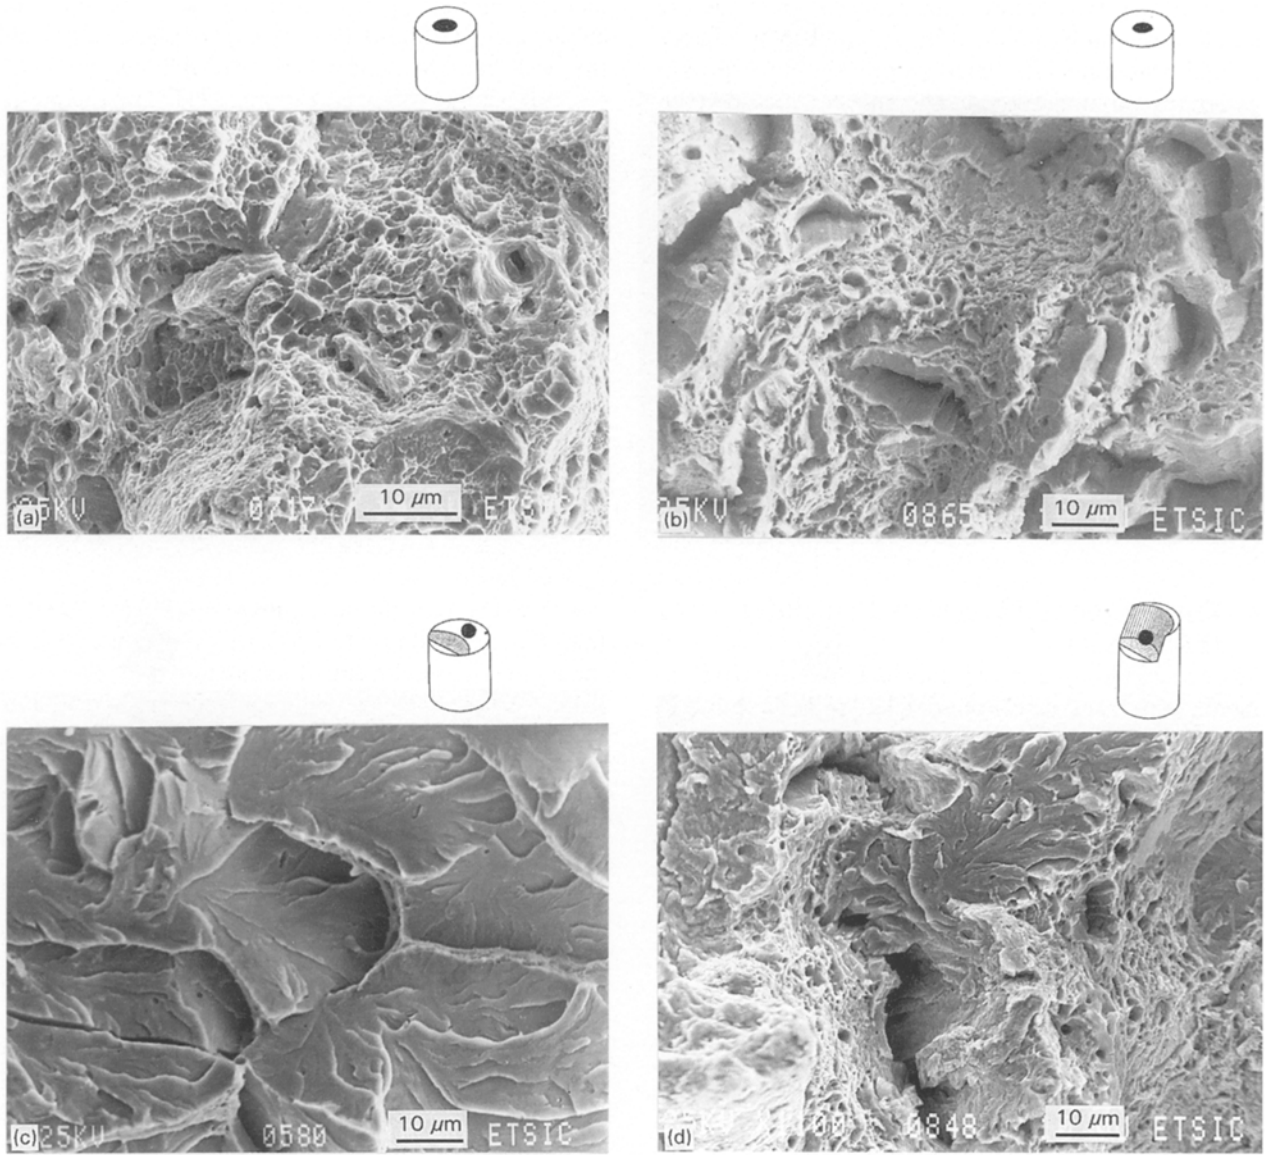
Microscopic modes of fracture in (a, b) smooth and (c, d) pre-cracked samples tested in an air environment: (a, c) hot-rolled, (b, d) cold drawn.
